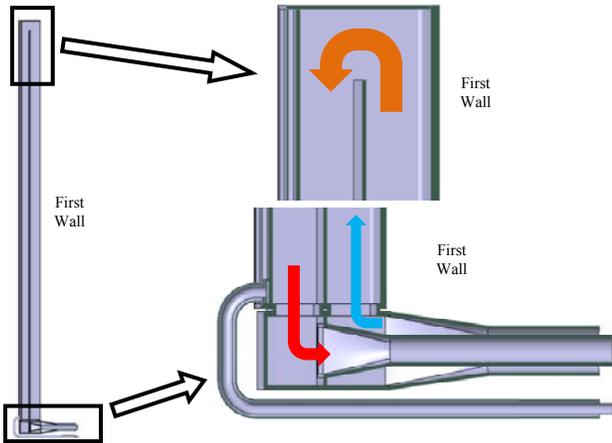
First design for IB DCLL blanket module, R=8.5m; PbLi flow path
